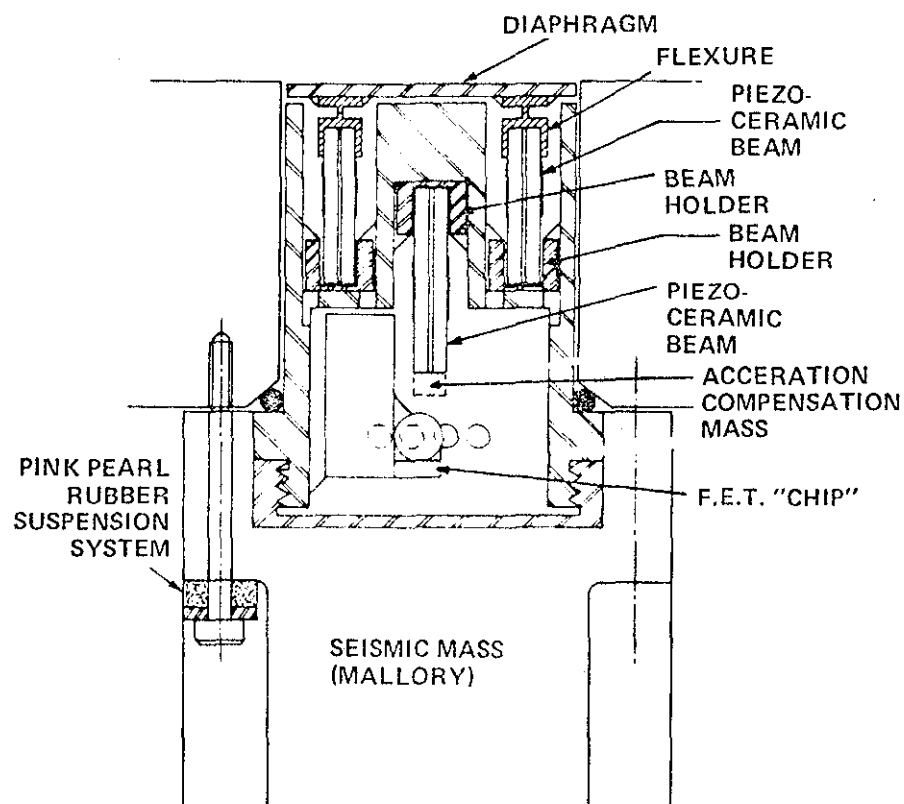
DRAWING OF SECTION THROUGH SKIN FRICTION TRANSDUCER
